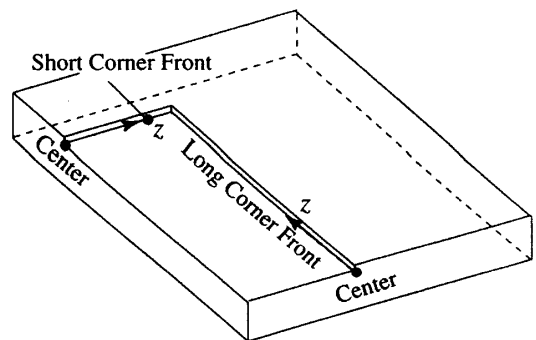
Short and long corner fronts in a lower portion of the molding resin
